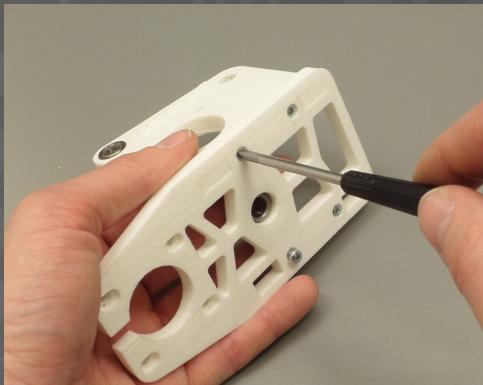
Assemble the two pieces with M3 Philips screws. Also fit the M3 Philips screws for the other side.
